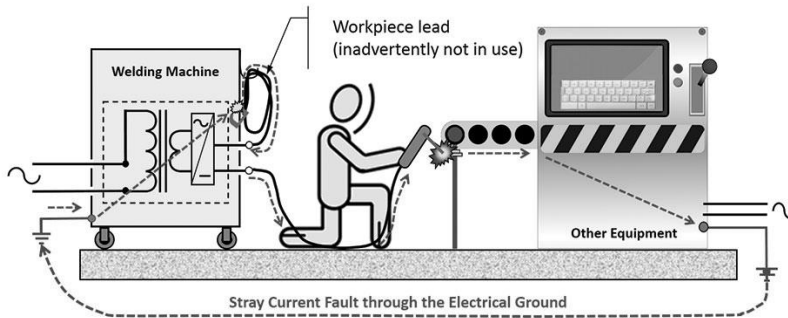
A stray welding current fault due to an operator error, which involves other electrically powered equipment
